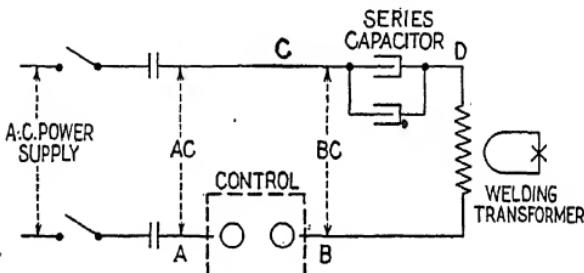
Connection of series capacitor with welder and control.
